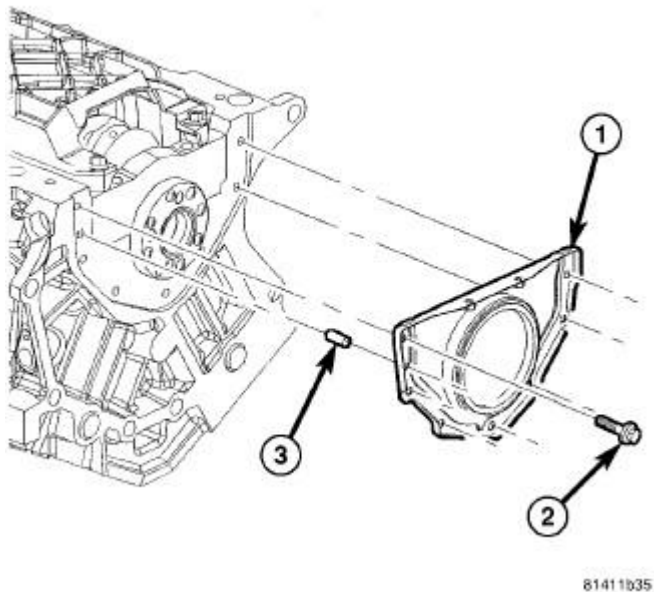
Rear Crankshaft Oil Seal & Retainer
